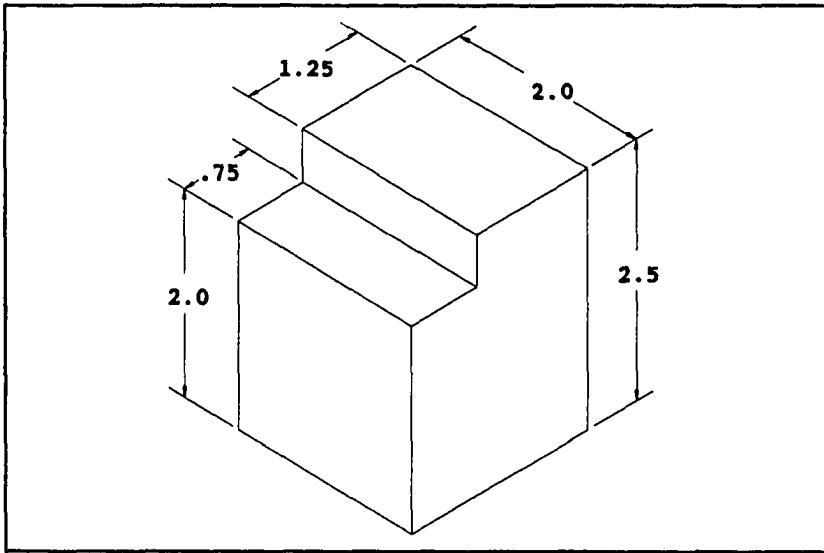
SINGLE SHEAR TEST SPECIMEN
